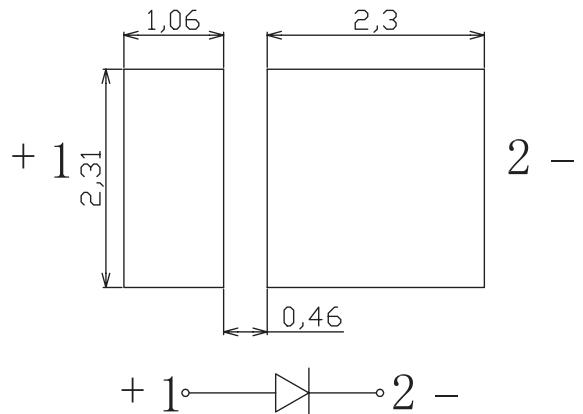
Recommended PCB solder pad layout for L128-xxxxRA35000A1.
